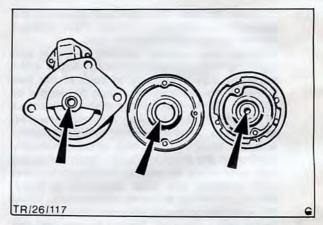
Commutator end cover, Intermediate bracket and drive end cover bushes
